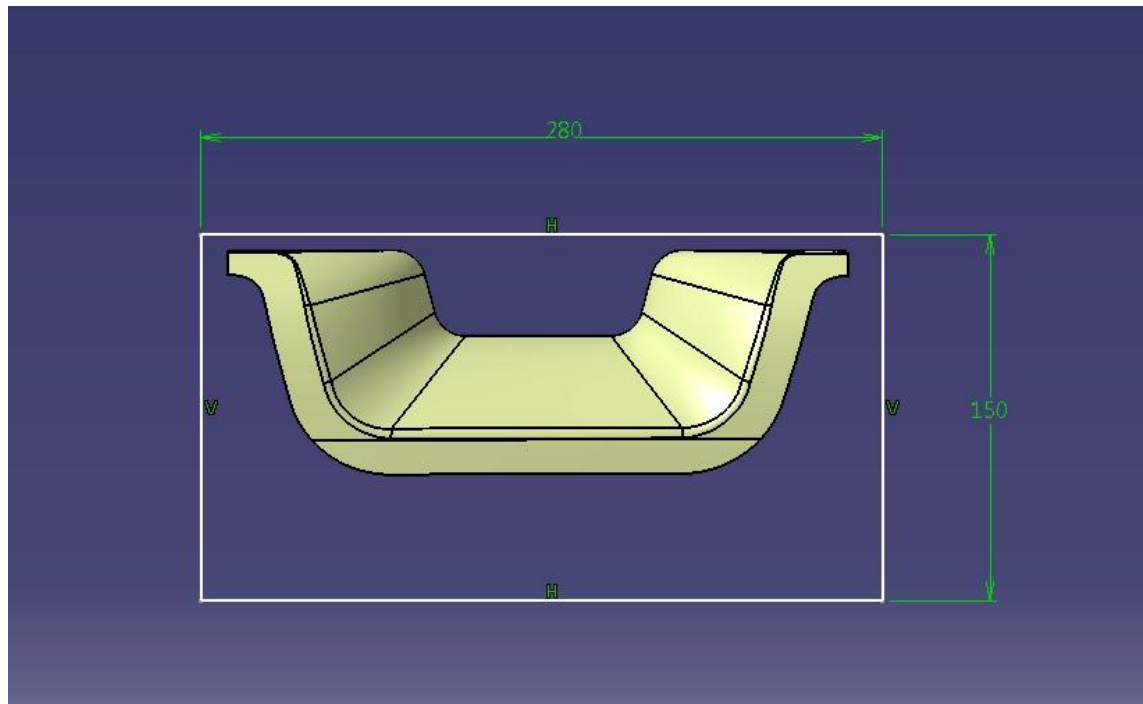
Fitting of the floor cross beam to the dimensions of the mould blank (side profile)
